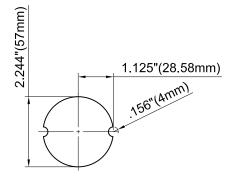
Sidewall Mount Bayonet Fuse Holder Mounting Hole Dimensions
